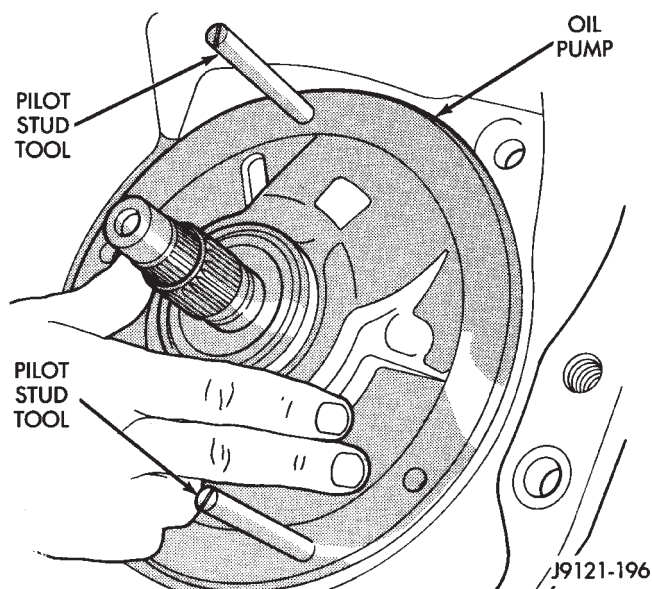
Installing Oil Pump And Reaction Shaft Support
